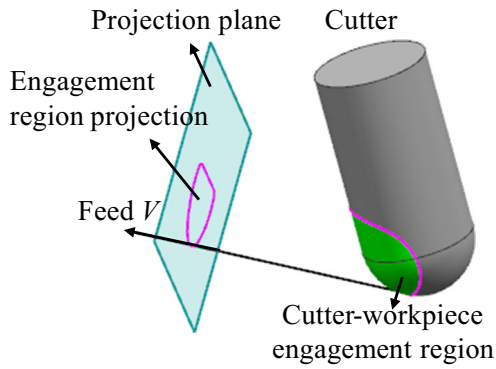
Schematic diagram of obtaining cutter-workpiece engagement maps
